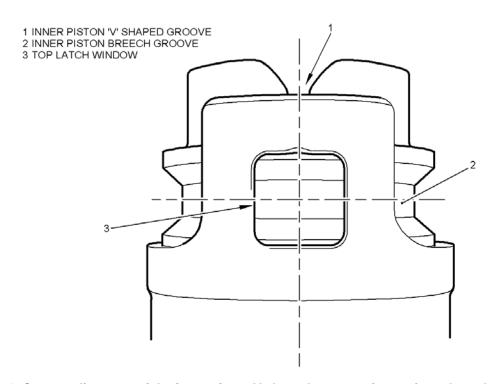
Correct alignment of the inner piston V shaped grooves, inner piston breech groove and the outer cylinder top latch window (pre and post Mod.02198 Part B)
